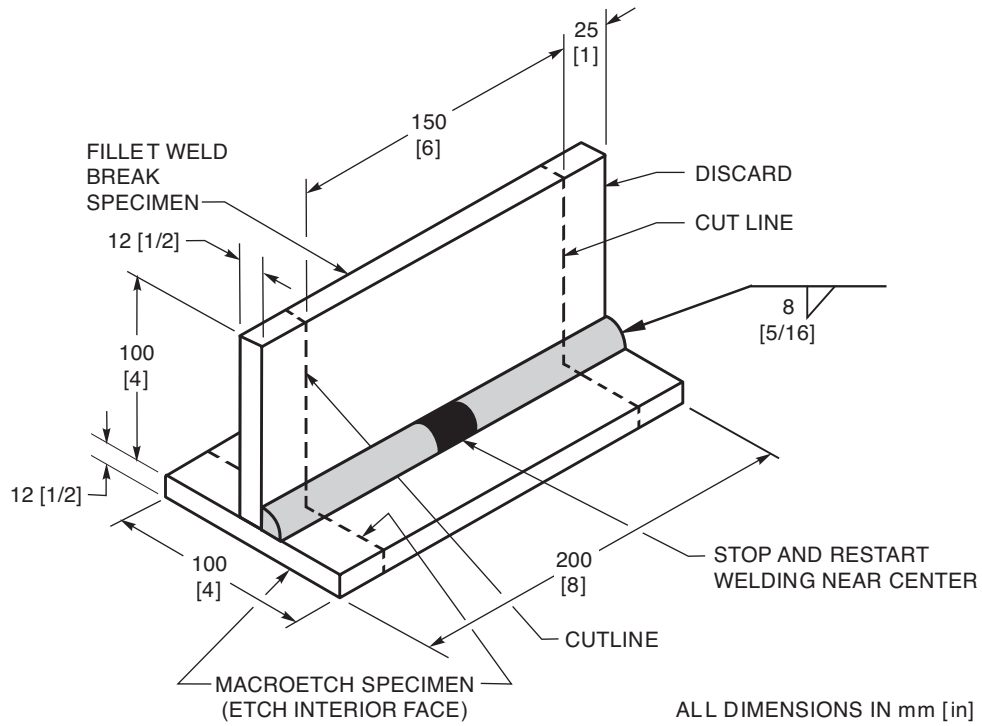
Fillet-Weld-Break and Macroetch Test Plate—Welder Qualification—Option 1 (see 7.23.1.4)
